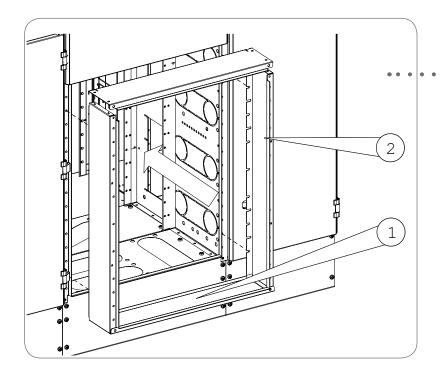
a) Elevation frames are fastened with screws to front profiles or side plates.
